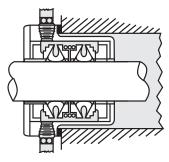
Cooling by means of vented driving ring, using liquid being sealed. Flush connection ports plugged with pipe plugs.
